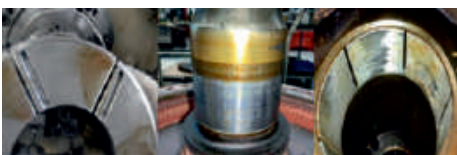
Varnish deposit on bearing pad of gas turbine from gas separation plant.
